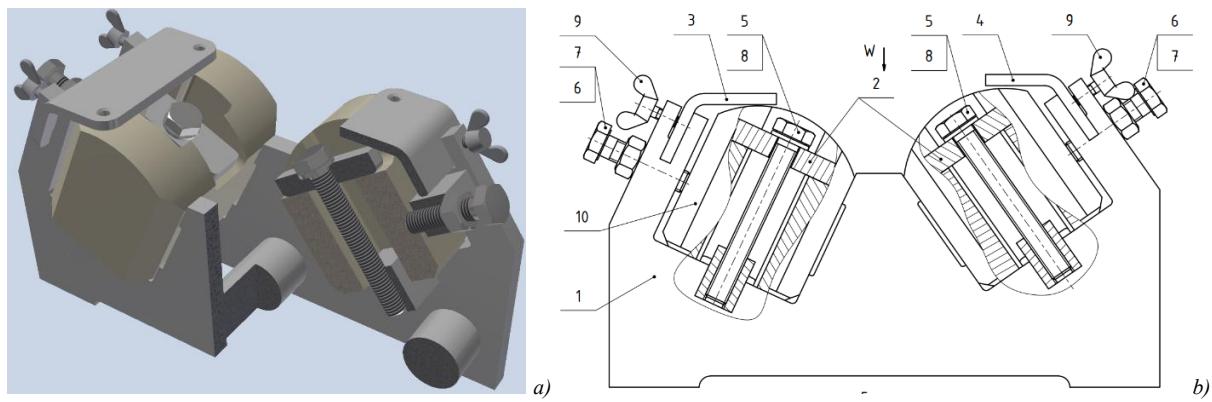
25-35 jig for positioning tool holders (Bołoz, 2025):
